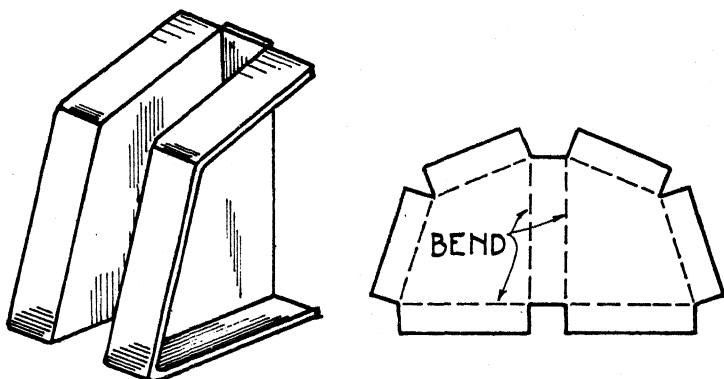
An interesting support made from plate, cut and bent then welded. Layout of the plate is shown at the right. This plan may be used for a wide variety of similar designs of many shapes and sizes.
